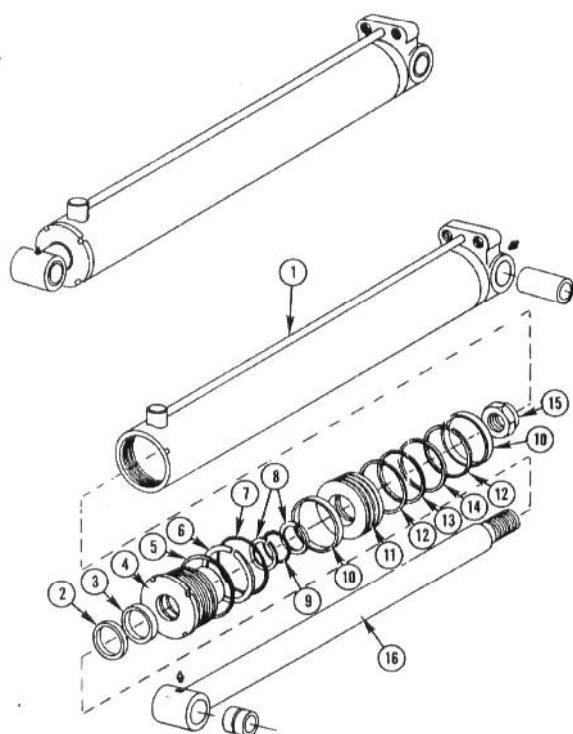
Identification of Parts Typical of MF Part Nos. 1605 079 M93 and 1605 081 M93
